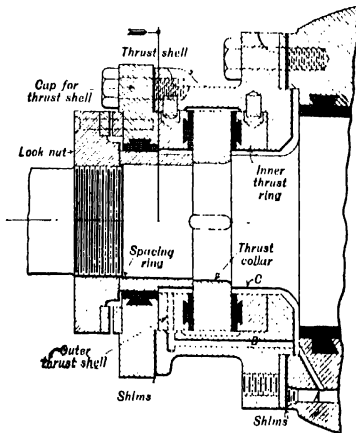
Details of Thrust Bearing used on Curtis Horizontal Turbines.
